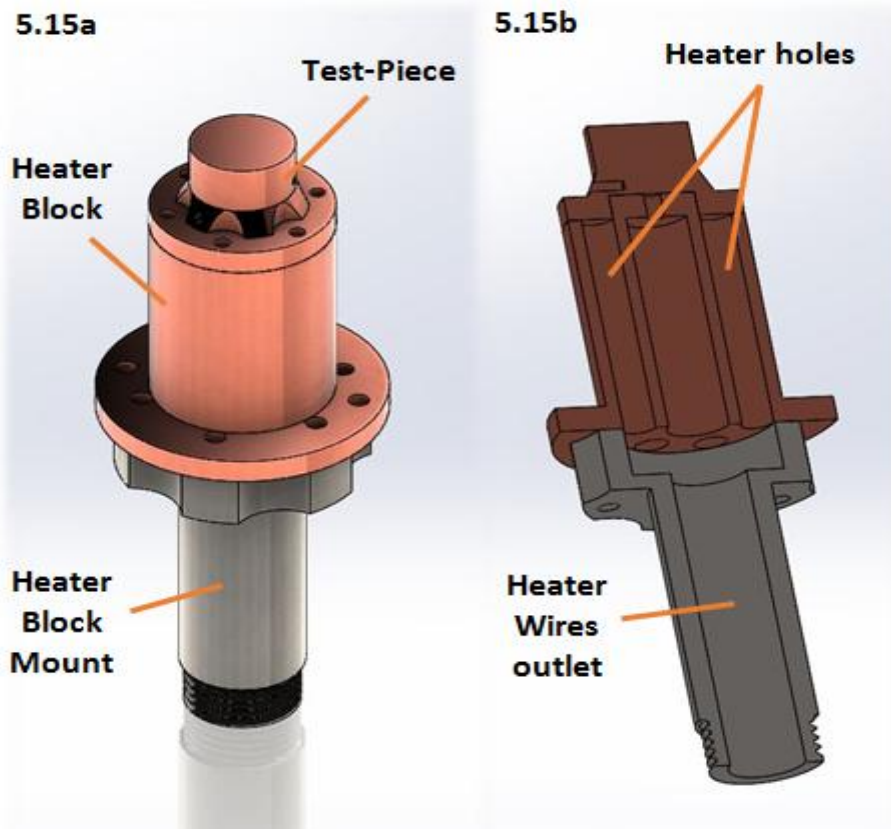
Heater block, test piece, and the heater block mount assembly.
